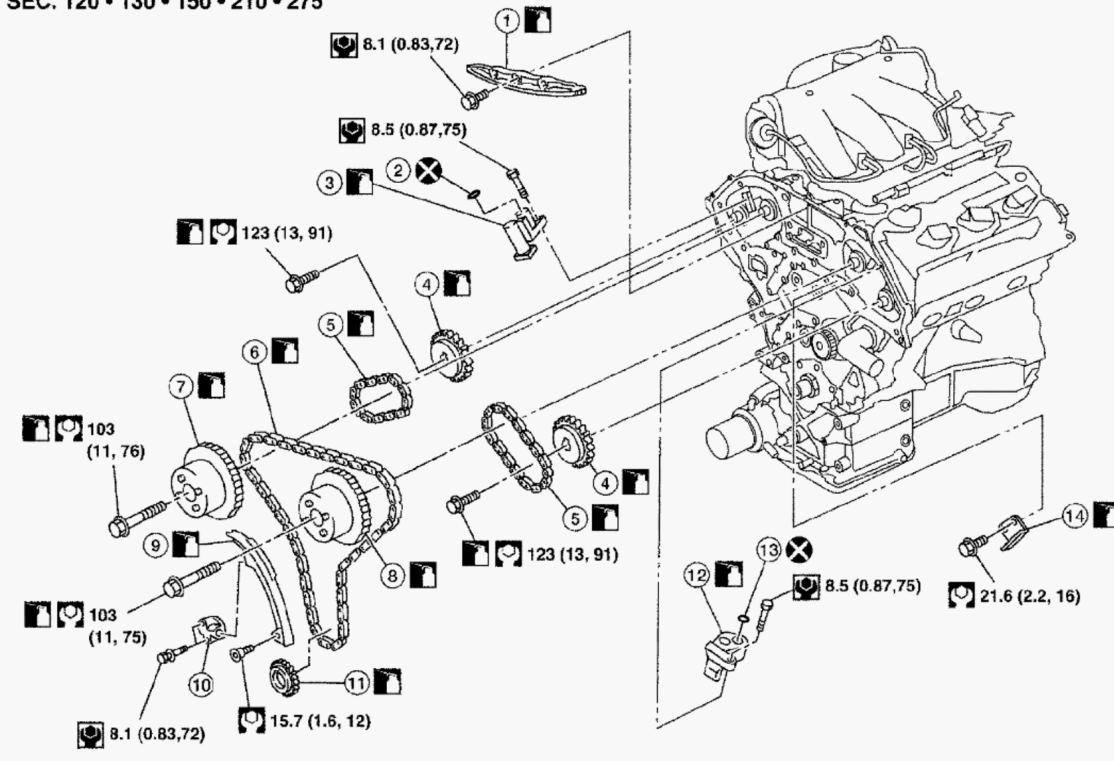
Exploded View Of Timing Chain Tensioner (1 of 2)
